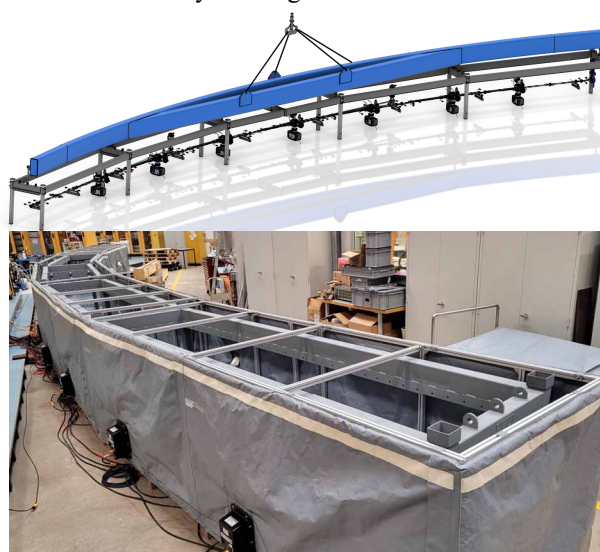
3D view of the vacuum arc attached to its lifting girder (top) and baking oven in SLS building (bottom).
